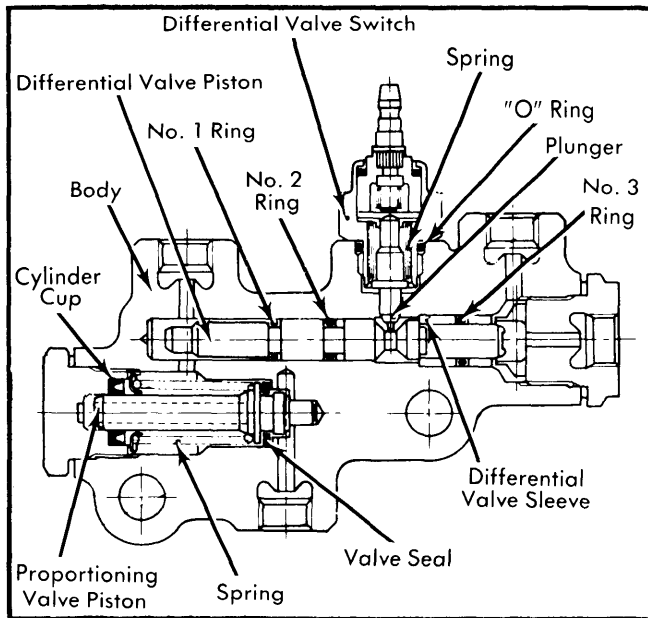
Sectional View of Combination Valve Showing Detail of Internal Components. Valve Shown is for Models with Rear Drum Brakes
